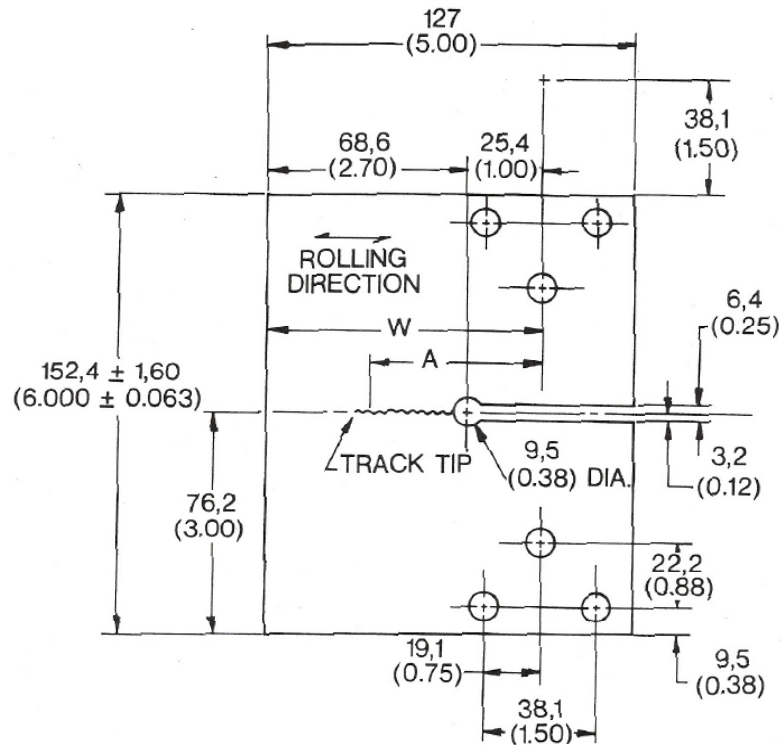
Test specimen design, mm (in.) (Tucker 1975)
